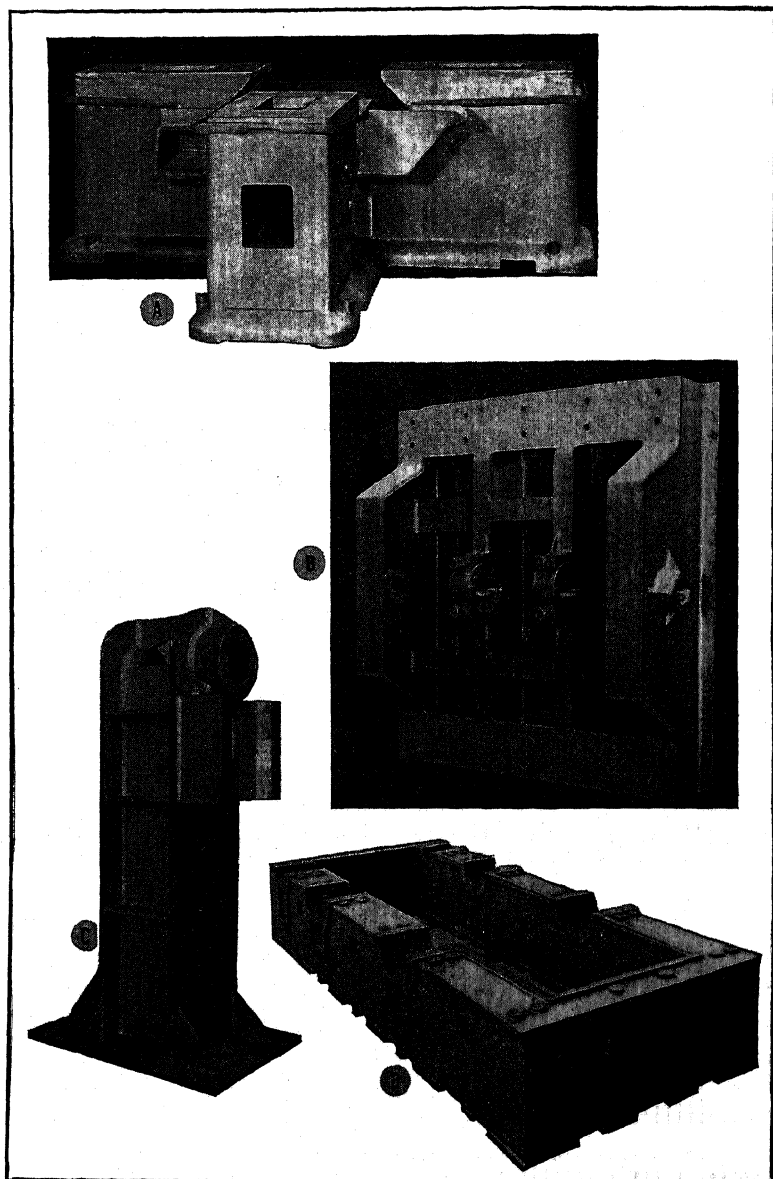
Bases—(A) 4,000-lb. base for boring machine. (B) Shovel base. (C) Column for press. (D) 26-ton main bed for gear unit.
